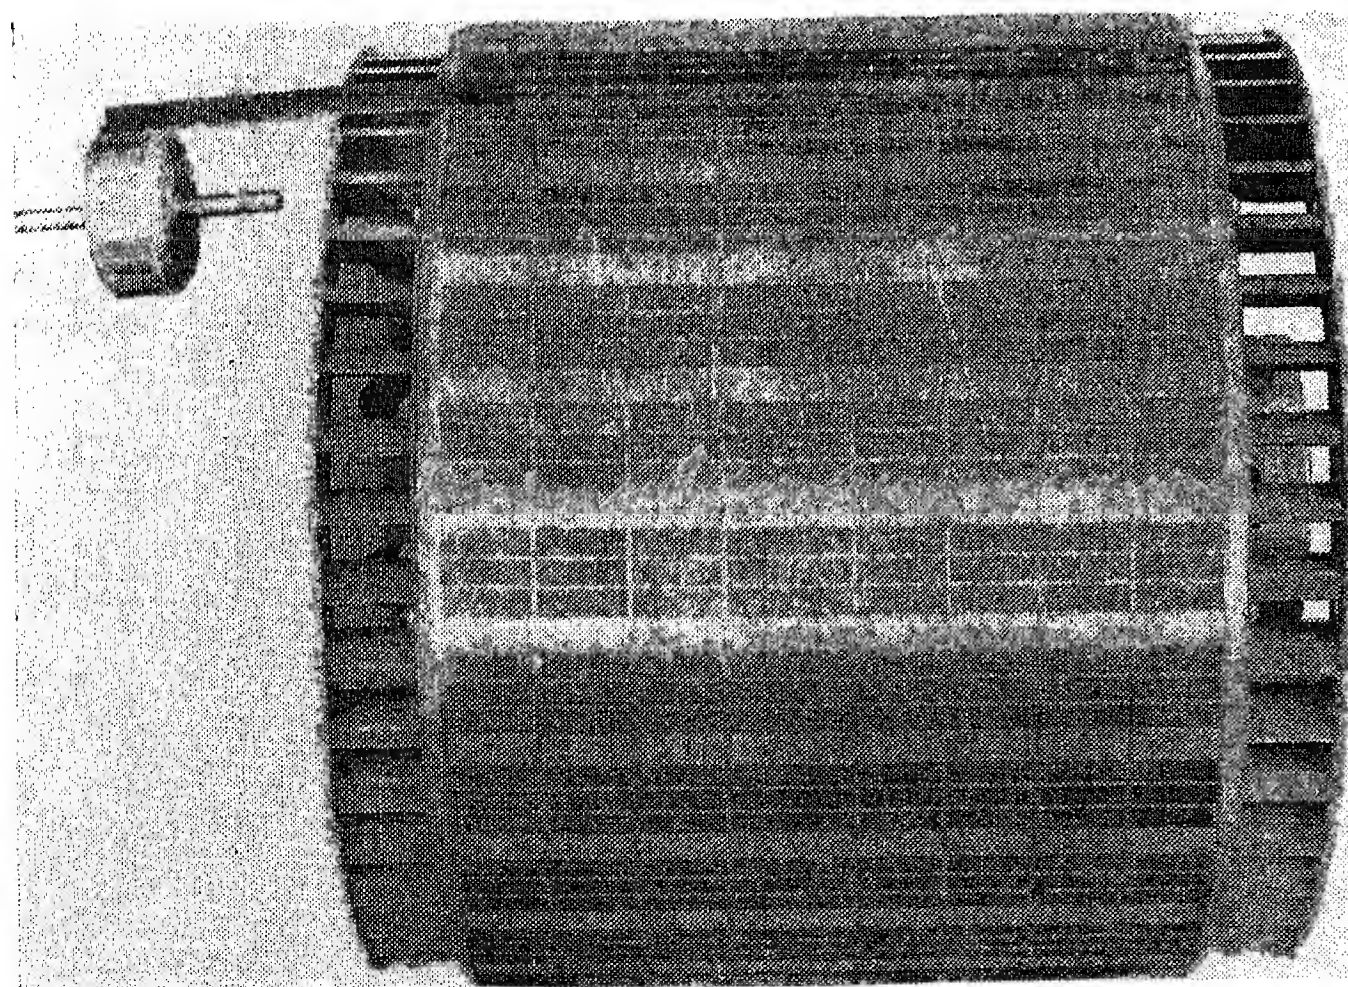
A 75-kva 28-pole 1,714-rpm 400-cycle rotor, single-bearing construction arranged for direct connection to the flywheel of a diesel engine. The 0.1-kw 12,000-rpm rotor is shown suspended by magnetism alone from a 6-inch steel scale. These are the same rotors shown in Figure 1
